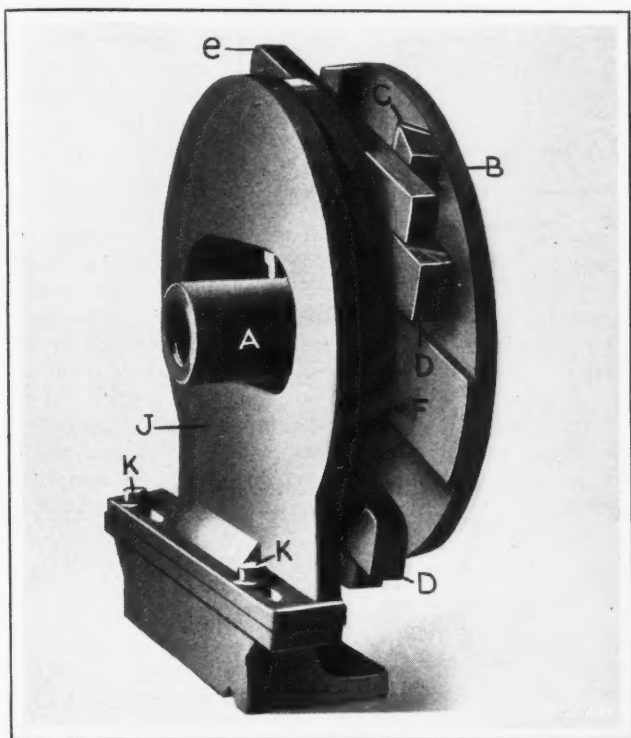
Lathe Attachment for turning Elliptical-shaped Work
